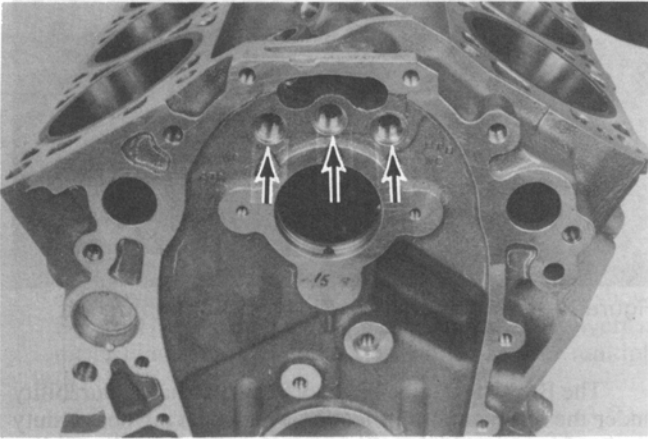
Aluminum Bow Tie has V8-style oiling; center gallery feeds camshaft and crankshaft bearings.
